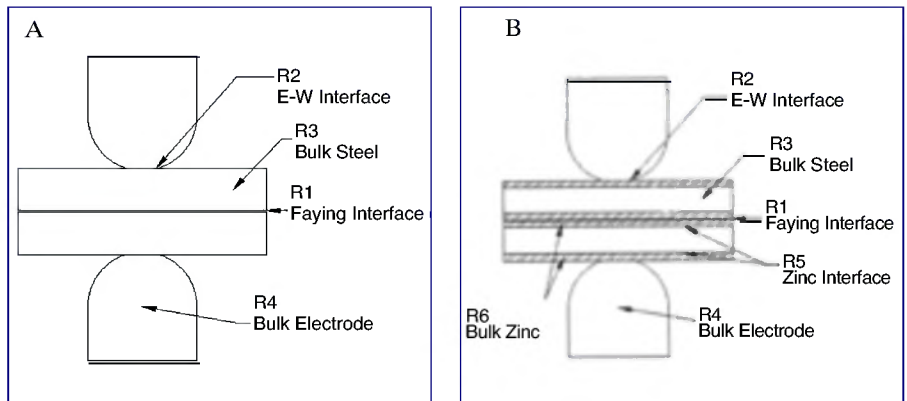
A — The schematic diagram of a steel weld showing electrical resistance; B — the added complexity and resistance of a coated steel weld.
